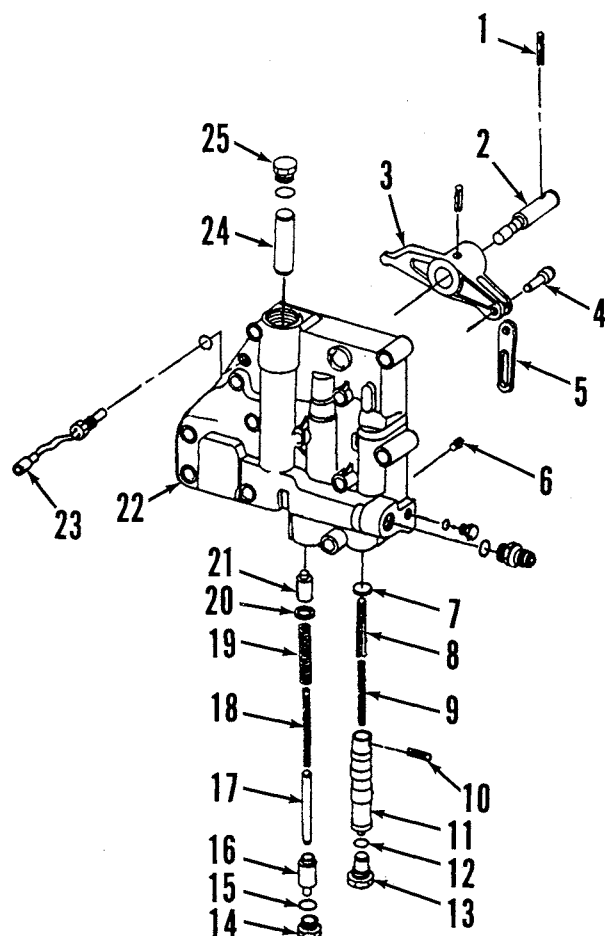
Exploded view of pto clutch control valve housing assembly. Housing is mounted to outside of traction clutch valve housing.
